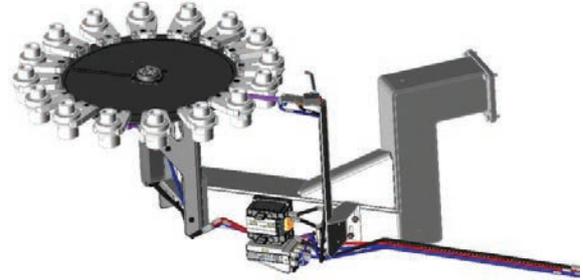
CAD model of a tool-holder carousel of a CNC machine tool.
